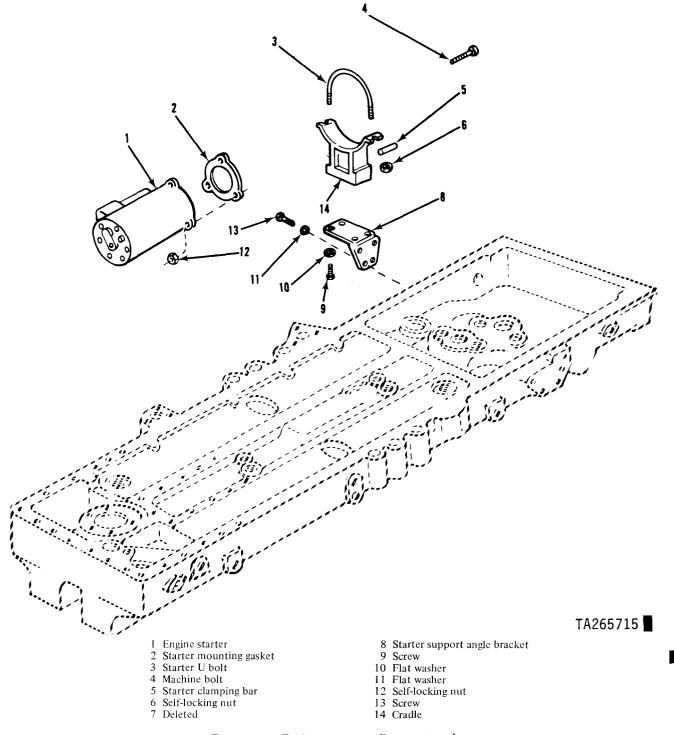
Engine starter, cradle support and associated parts – exploded view.
